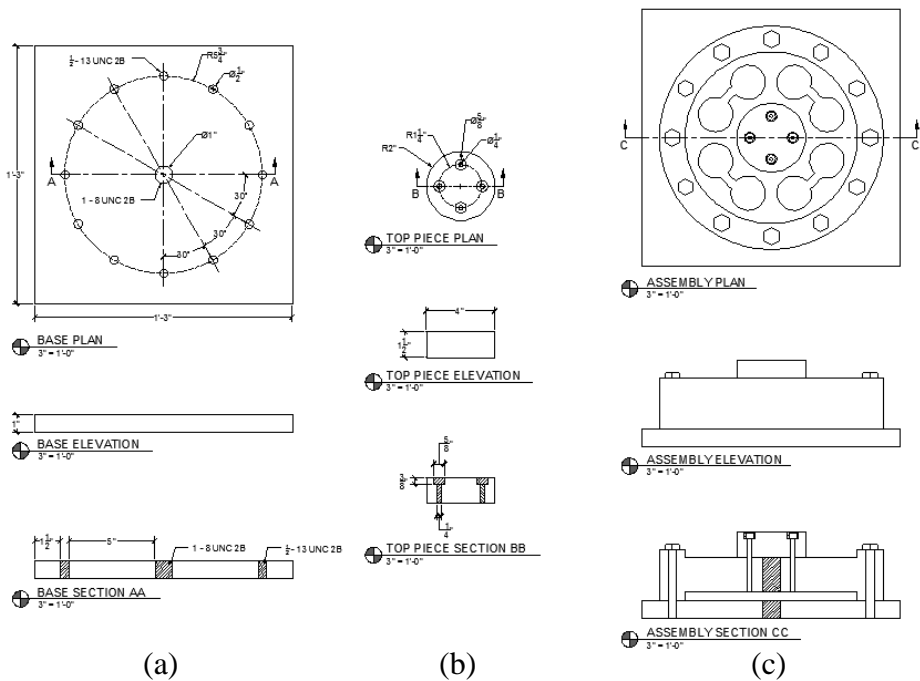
Load cell schematics: a) tension base b) compression piece c) assembly
